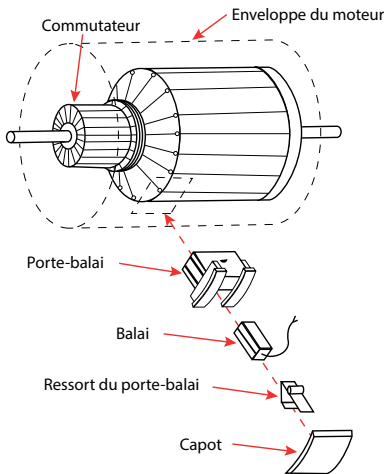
A typical representation of a DC motor showing an exploded view of the brush components and with multiple loops making up the armature.
